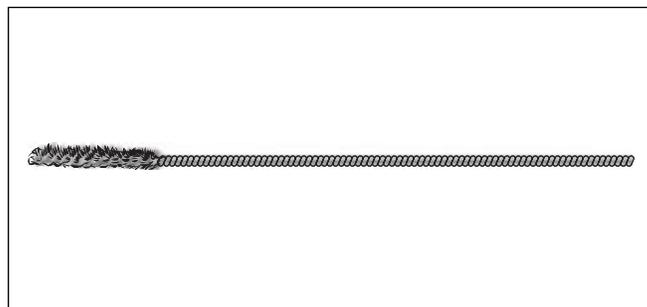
Valve Guide Hone (Part No. B-45525)
